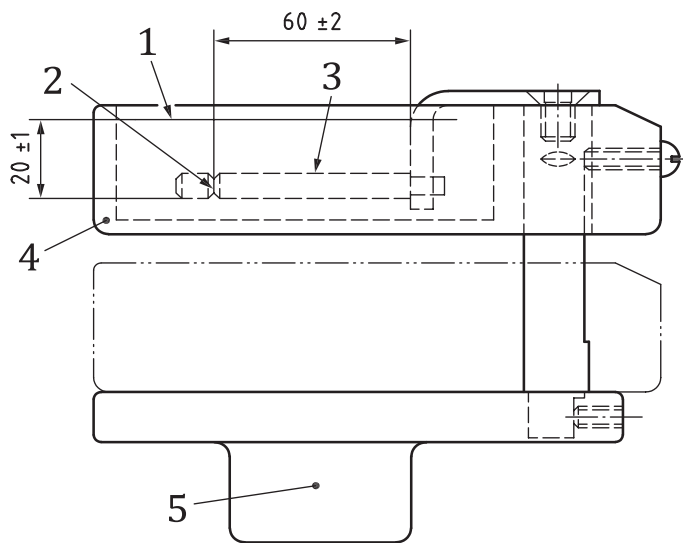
Positioning of a test piece5.1.3 Finch Cup soaking device
